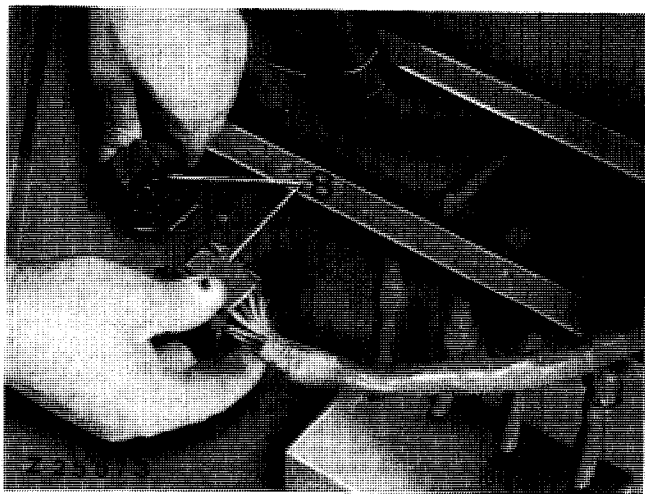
Wiring Harness Plug next to Operator's Seat (Seat Removed)
